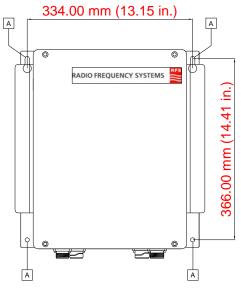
POSITION OF THE HOLES IN THE SUPPORT BRACKETS FOR THE EQUIPMENT
